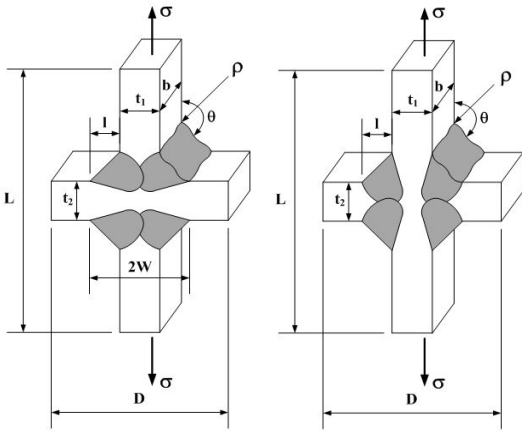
Configurations of LC type specimen and N-LC type specimen.
